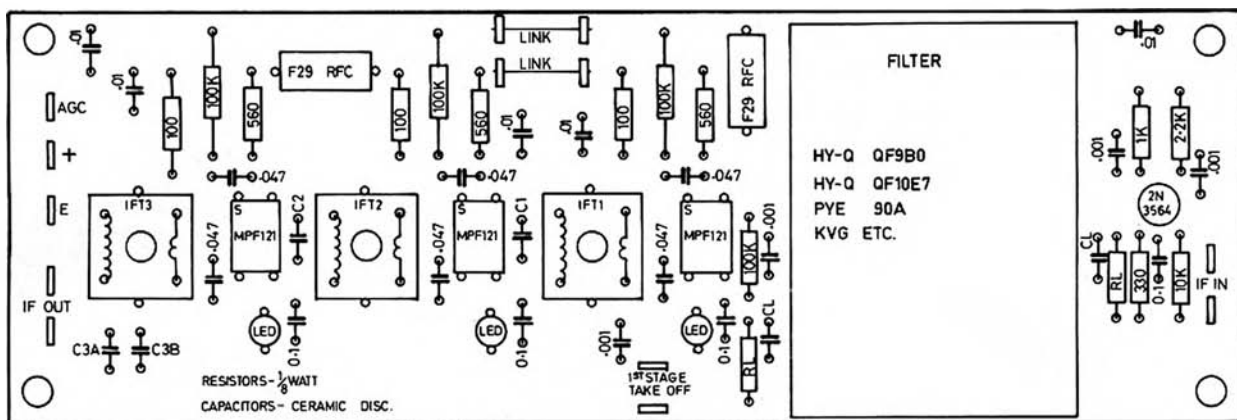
UNIT B - COMPONENT LAYOUT
